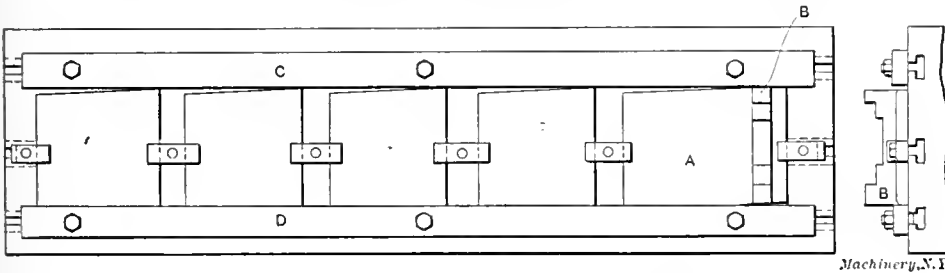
"String" of Fixtures on the Platen of a Planer.
